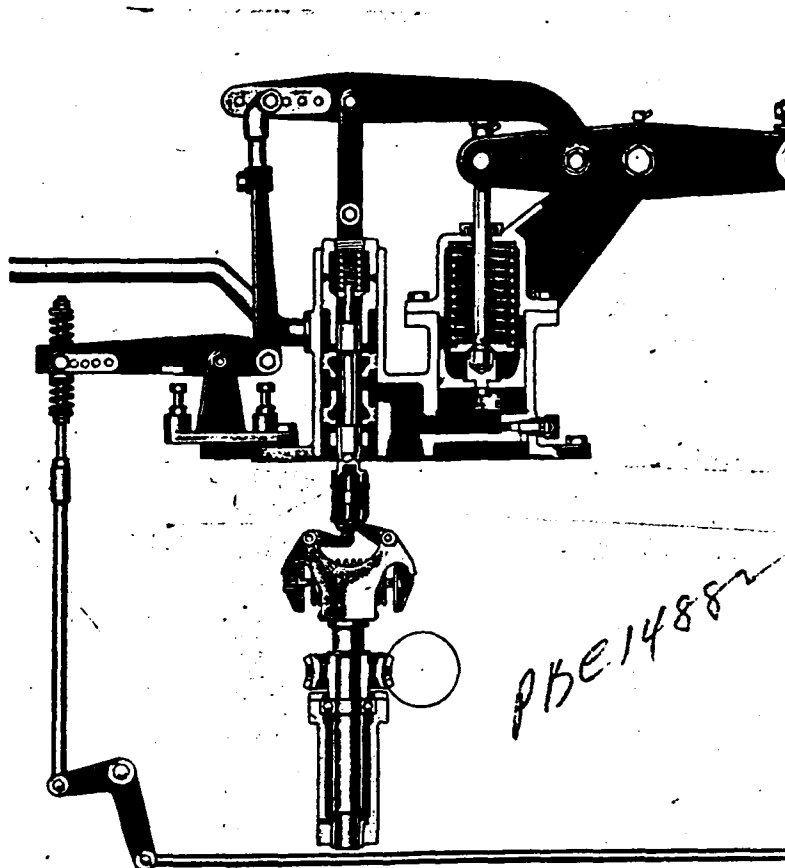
CONTROL-VALVE AND HAND VALVE COMBINATION
